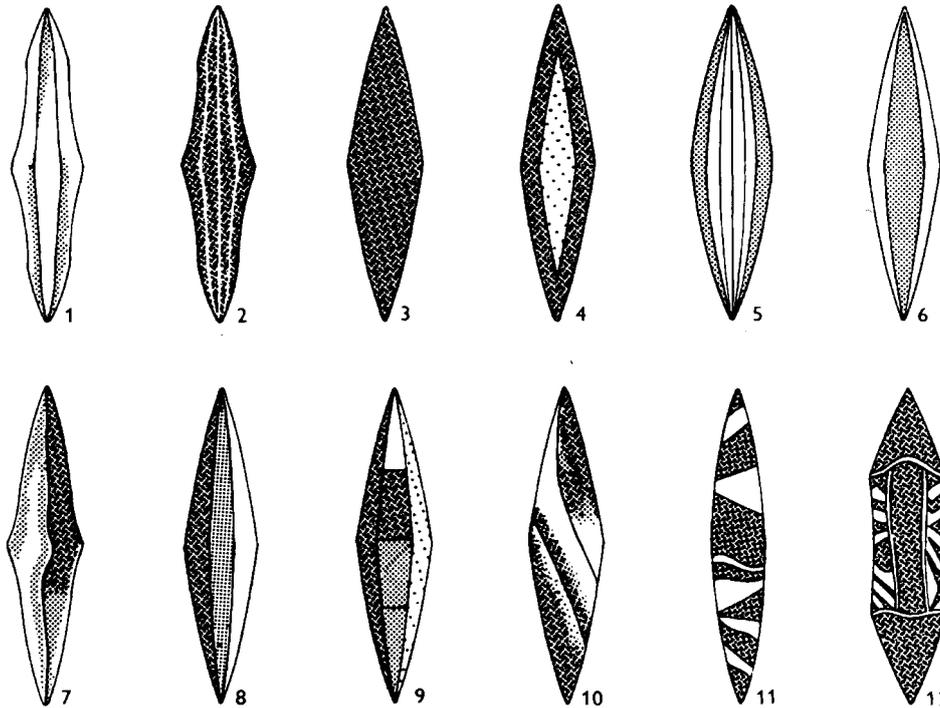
Reconstructions of important blade-constructions (hardenable steel over 0.3 per cent C)
